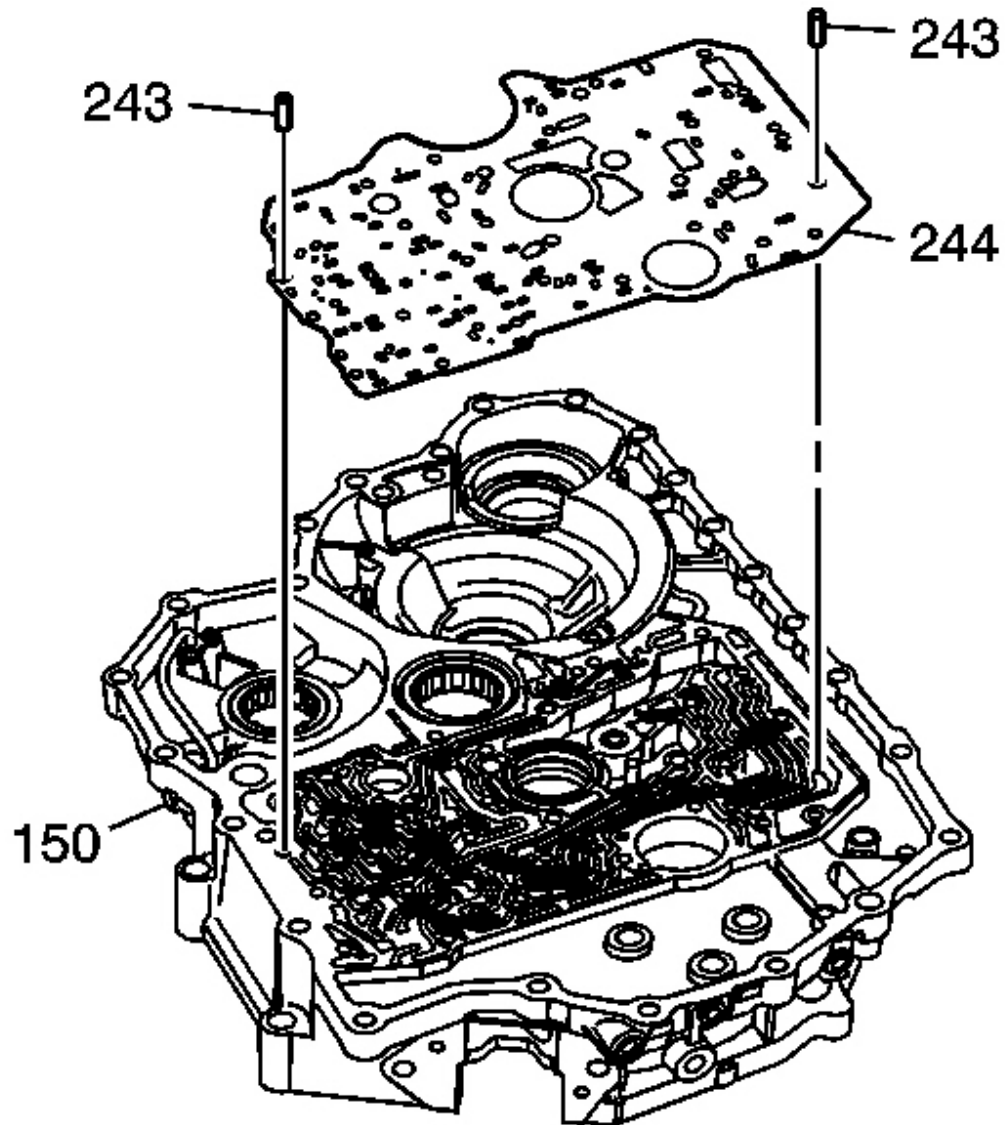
Control Valve Body Spacer Plate & Locating Pins
